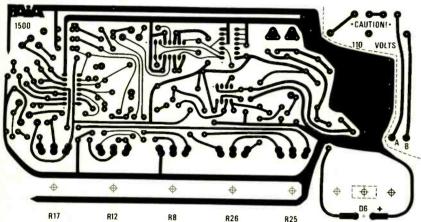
FOIL PATTERN of single-sided PC board shown half-size.
